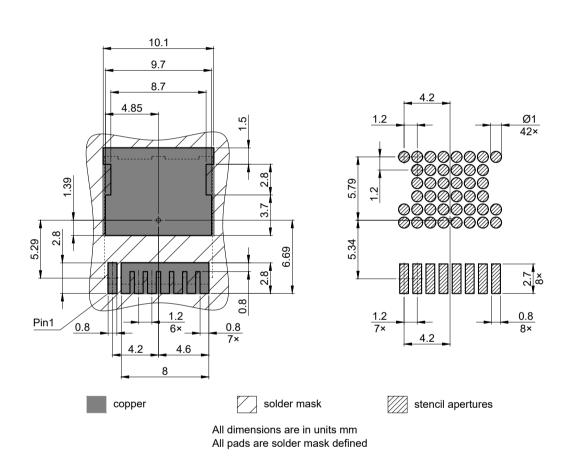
Footprint Drawing PG-HSOF-8, dimensions in mm
